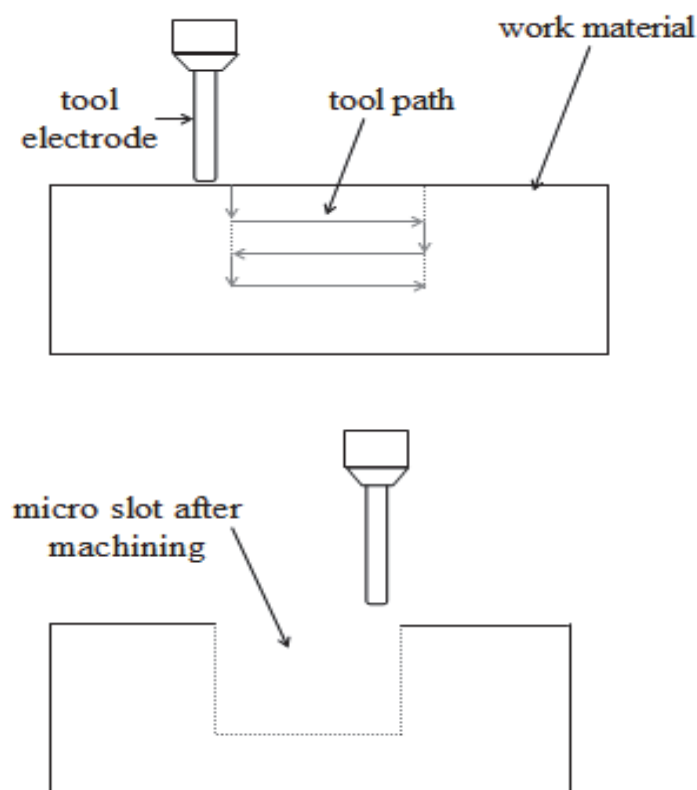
Layer by layer machining: (a) before machining, b) after machining
